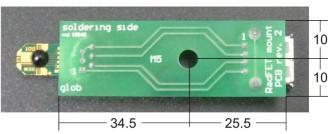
RADFET mount with correctly inserted RFT-300-CC10G1 sensor (dimensions in mm)
